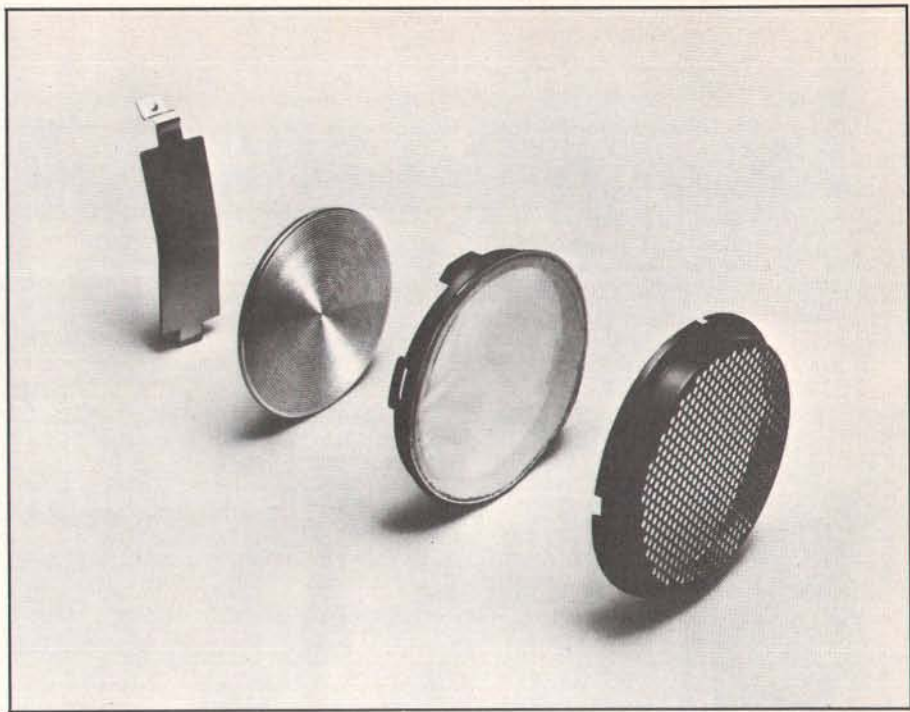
Expanded view of the Polaroid ultrasonic sonar transducer. Behind a honeycomb grill, a 0.003-inch (0.07 mm)-thick gold-coated foil stretches over a concentrically grooved aluminum plate. The retainer at left holds the parts in place.
